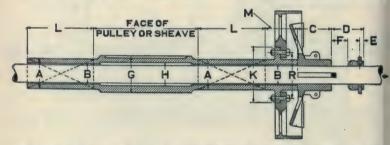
,858.—Quill drive. This is the proper transmission arrangement substitute for heavy service, requiring large pulleys, sheaves, gears, rotors, etc. It is a hollow shaft supported by independent bearings. The main driving shaft running through the quill is thus relieved of all transverse stresses. The power is transmitted to the quill by means of a friction or jaw clutch. When the clutch is thrown out the pulley or sheave stands idle and the driving shaft revolves freely within the quill. As there is no contact between moving parts there is no wear. Jaw clutches should be used for drives demanding positive angular displacement. They can only be thrown in and out of engagement when at rest. All very large clutch pulleys, sheaves, or gears designed to run loose on the line shaft are preferably mounted on quills. The letters A, B, C, etc., indicate the dimensions to be specified in ordering a quill.
